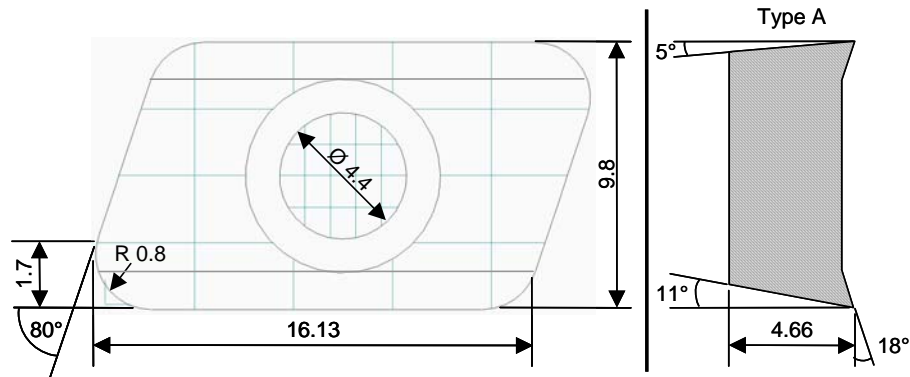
Top and cross-sectional side view of the insert tool cutter geometry. Both Uncoated Carbide (UC) and Diamond Coated Carbide (PCD) inserts had the same geometry. All dimensions are in millimeters.
